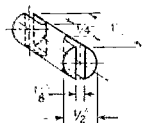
The spacing insulator for the driven element may be made from a piece of rod or sheet of Plexiglas or other good insulating material.
